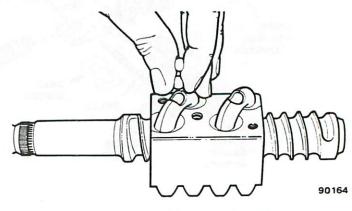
K-7 Installing Bearings in Ball Nut Circuits
